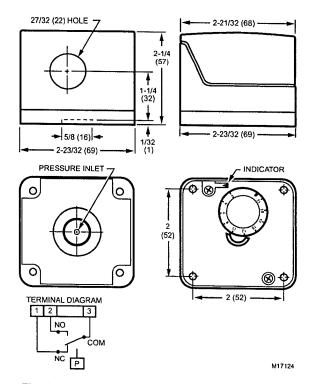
C6097 Flange Mount dimensions in in. (mm).
